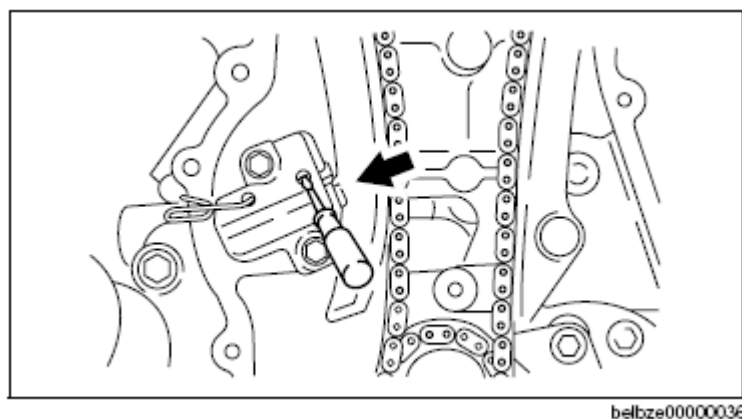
Holding Chain Tensioner Ratchet Lock Mechanism Away From Ratchet Stem With Thin Screwdriver
